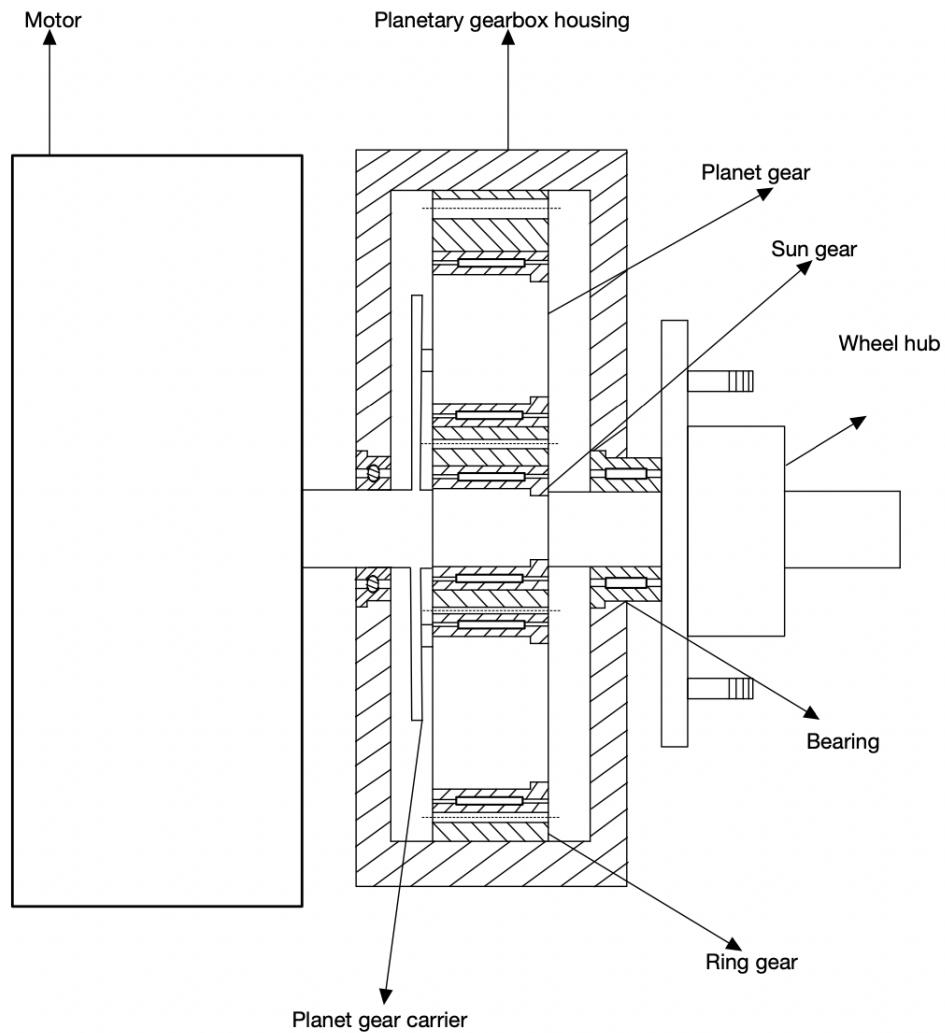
Side View of the Planetary Gearbox with a Motor [6]
